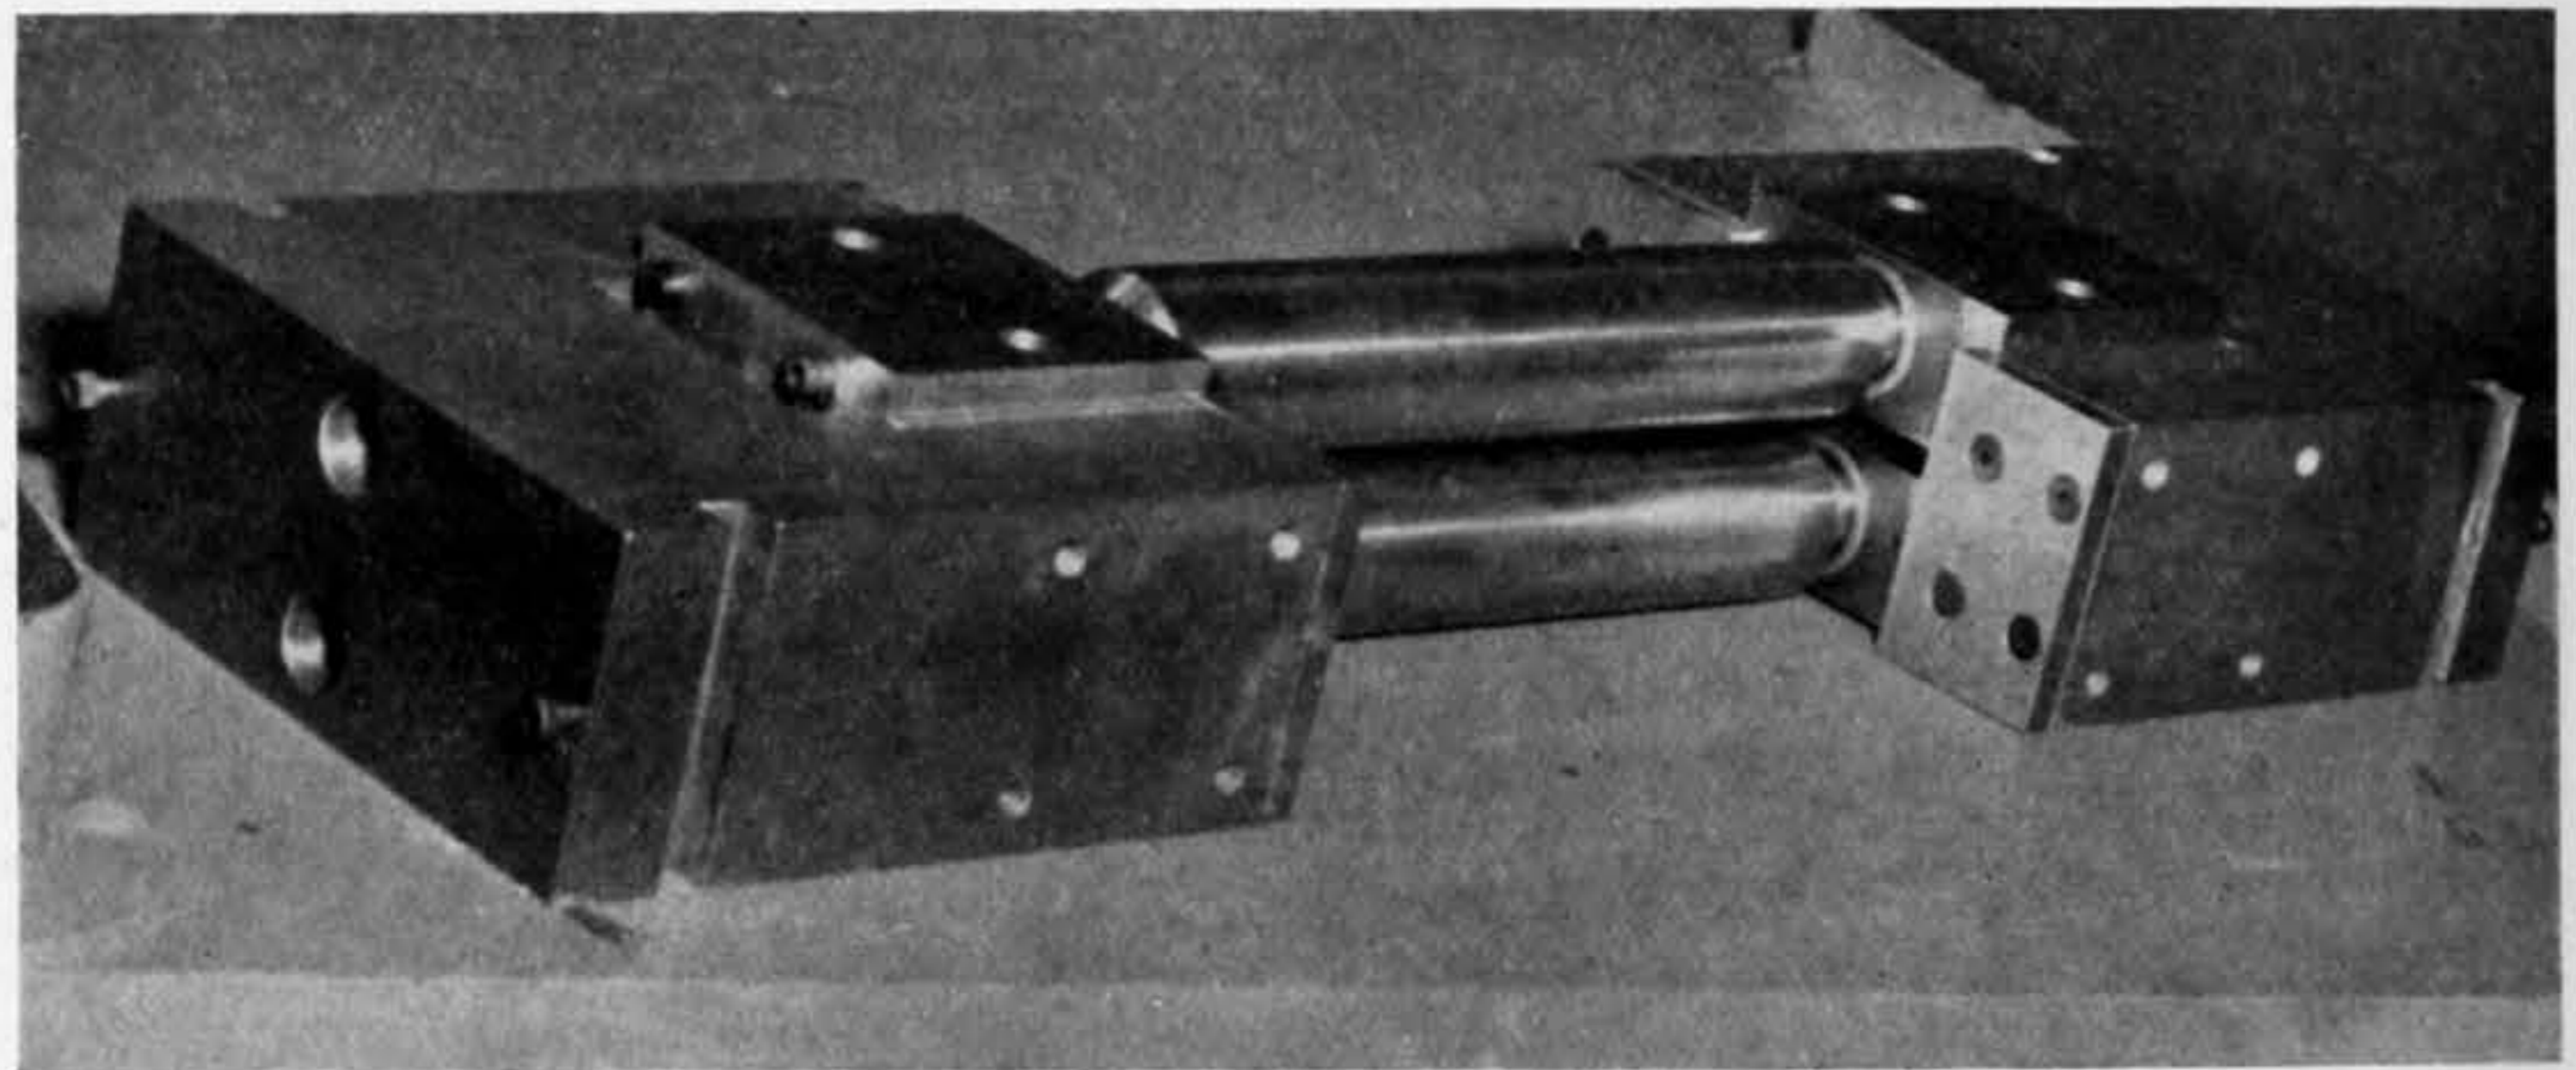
Small diameter work roll assembly after withdrawal from mill
